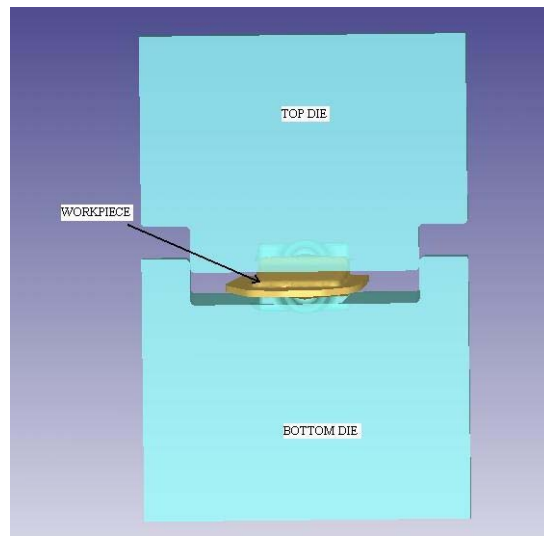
Position of the Dies and Workpiece in Operation 3
